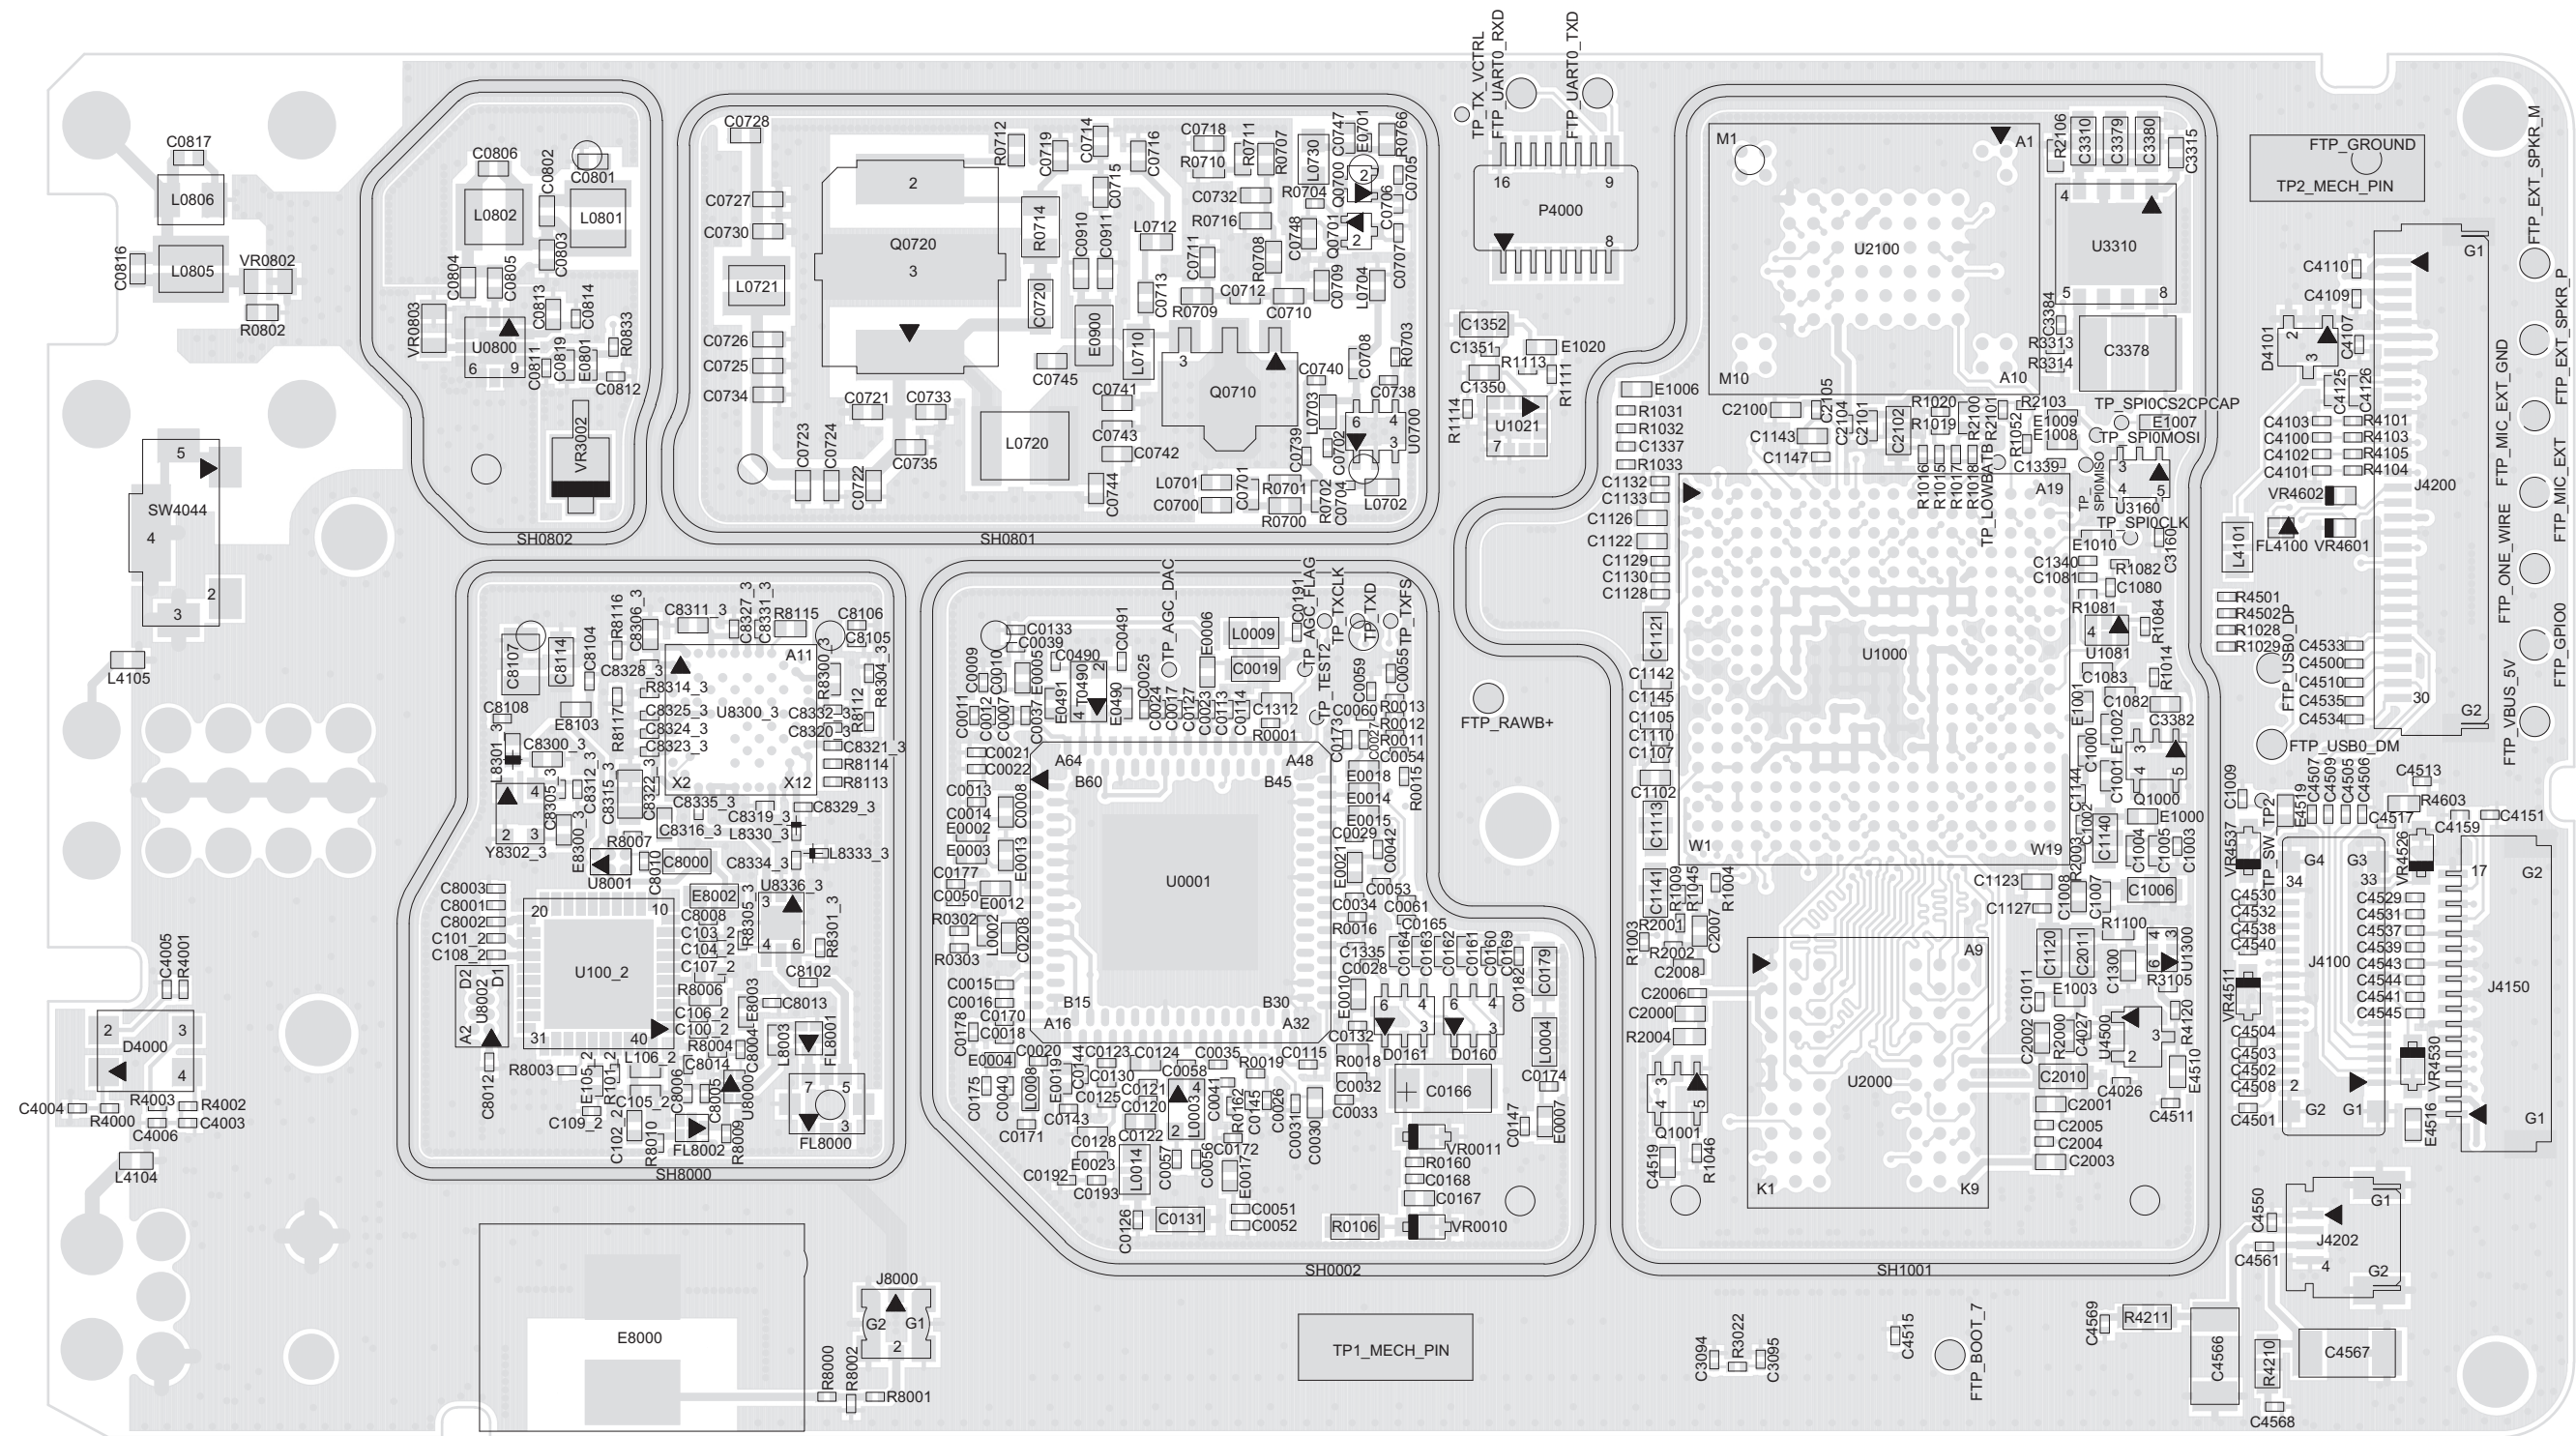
Main Board UHF Top Side PCB No. PC000813A01\_AB
